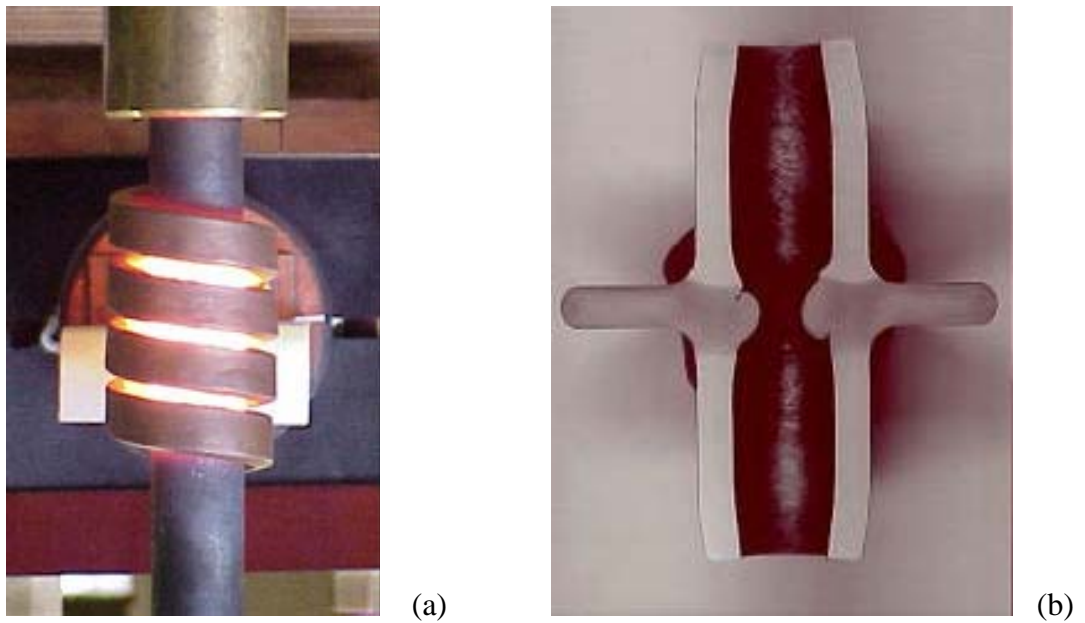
(a) Heating of the workpiece by means of induction coil. Symmetry of heating is provided by rotation of the workpiece. (b) The cross sectional view of a cut hollow specimen after upsetting [11, 12].
